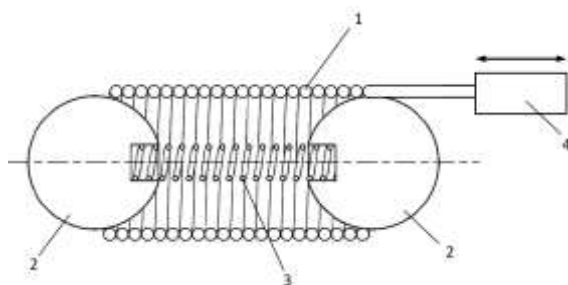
Spring-loaded microspray system: 1 - spring; 2 - ball; 3 - connecting spring; 4 - transverse vibration vibrator
